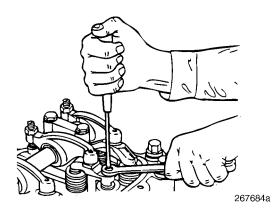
Loosening Valve Yoke Adjusting Screw Locknut
